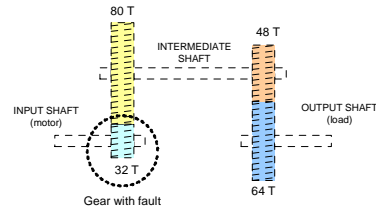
two stage gearbox with a missing tooth on the input shaft
